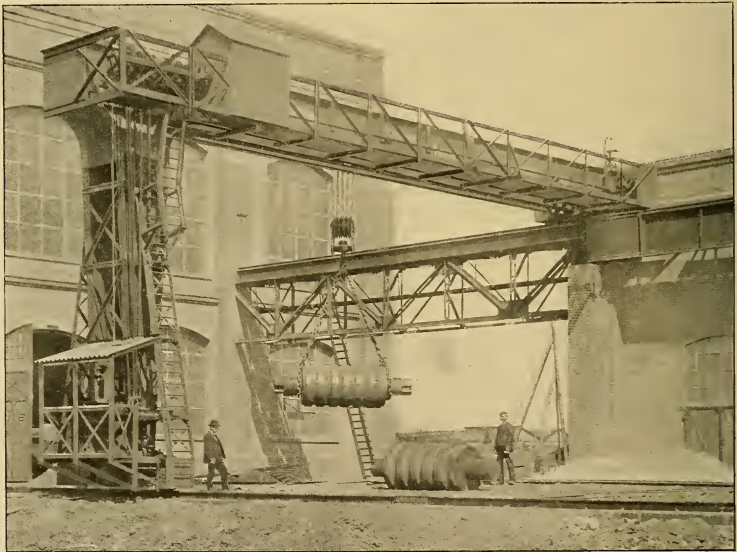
A 30-TON ELECTRICALLY-DRIVEN ANGLE PORTAL CRANE, BUILT BY THE DUESSELDORFER
